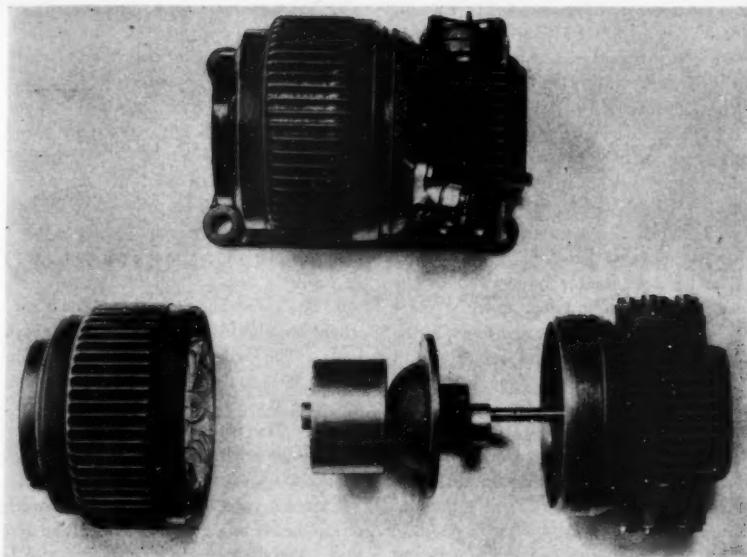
GIBSON HERMETIC MOTOR COMPRESSOR ASSEMBLY PARTS
